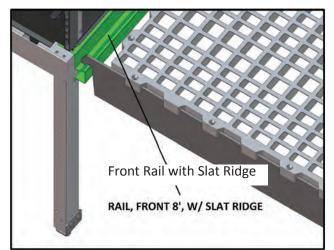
Slat Ridge Front Rail (Non-Winchable)
